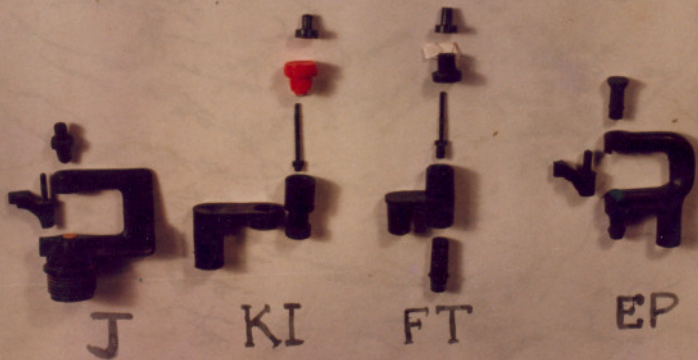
MICRO-SPRINKLER HEADS - EXPLODED VIEW.
